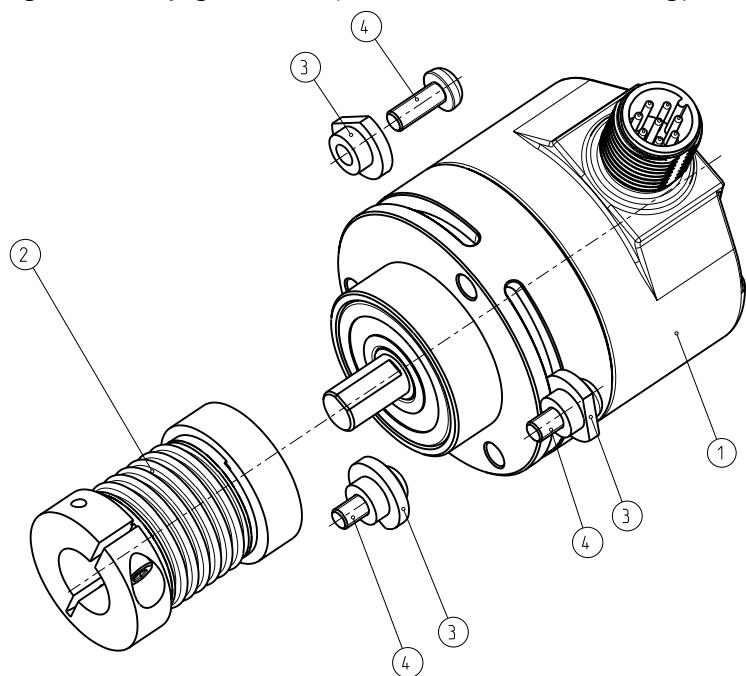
Assembly figure of SKS36S/SKM36S Stand-Alone with servo clamps
